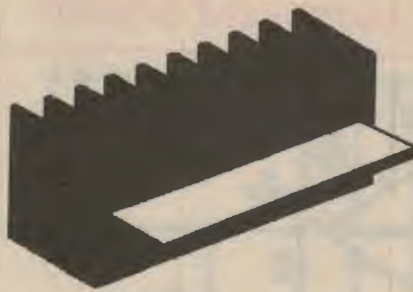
The heatsink used in the author's prototype. A solid casting, it has a 'ledge' to mount the PCB.
